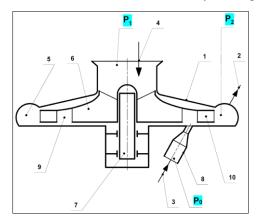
Scheme of the developed and patented turbomachine [6] under the RF utility model patent No. 213280: 1 – casing; 2 – outlet channel (pressure P_2); 3 – working fluid inlet channel (pressure P_0); 4 – pumped fluid inlet channel (pressure P_1); 5 – mixing chamber; 6 – impeller; 7 – shaft; 8 – nozzle diaphragm; 9 – annular channel; 10 – turbine blades.
